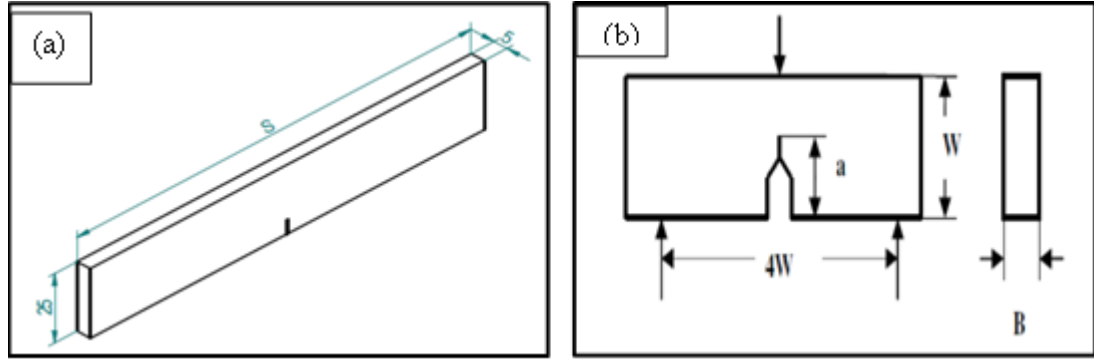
(a) and (b) Dimensions of SENB specimen [138]
